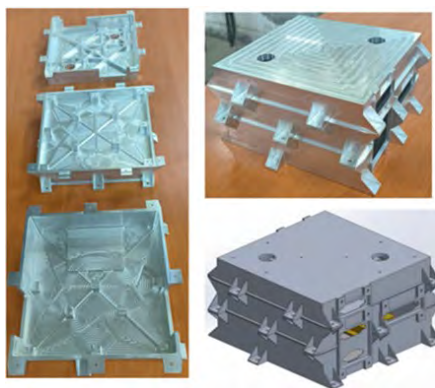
PS4 Langmuir Probe Assembly (3-Tray Package)
